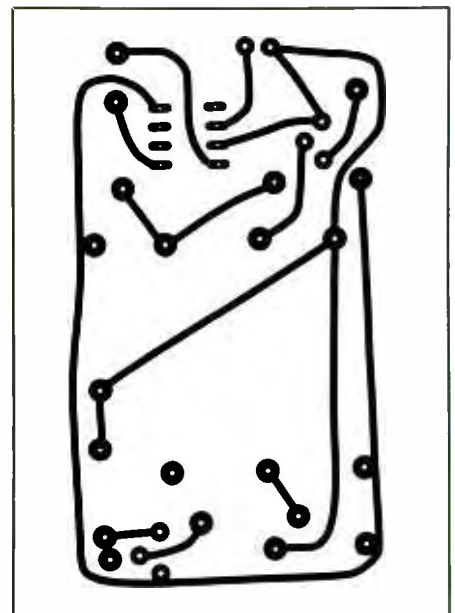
Actual-size etching-and-drilling guide for printed-circuit board for IR detection circuitry.
